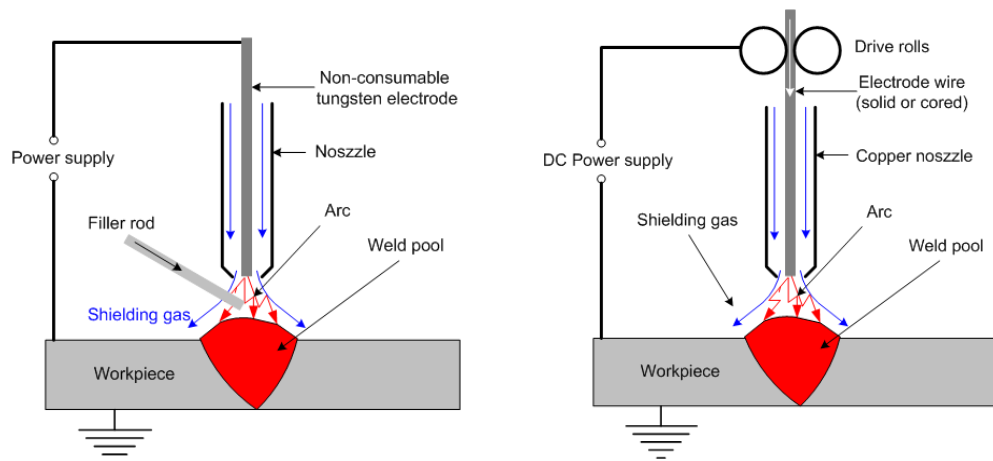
Two of the most widely-used welding processes. (left) GTAW (TIG) with optional filler rod in use; (right) GMAW (MIG).
